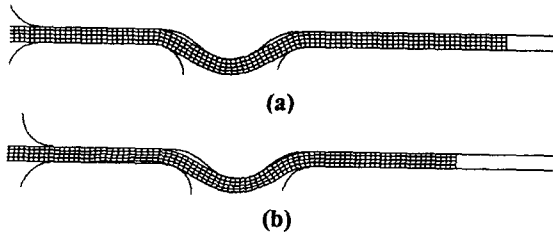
Deformed shapes of the blank during the drawing process of circular drawbead in frame_frt_in: (a) initial state; (b) 10 mm extension.
